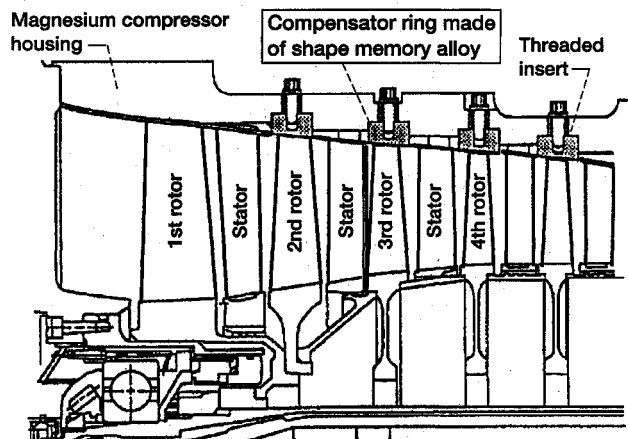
Shape memory alloy compressor shroud seal shown in compressor cross section.¹⁸
